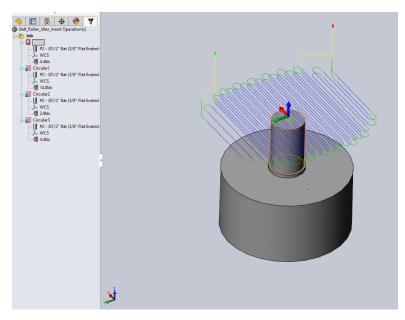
Facing Operation for the Belt Roller Idler Insert.
